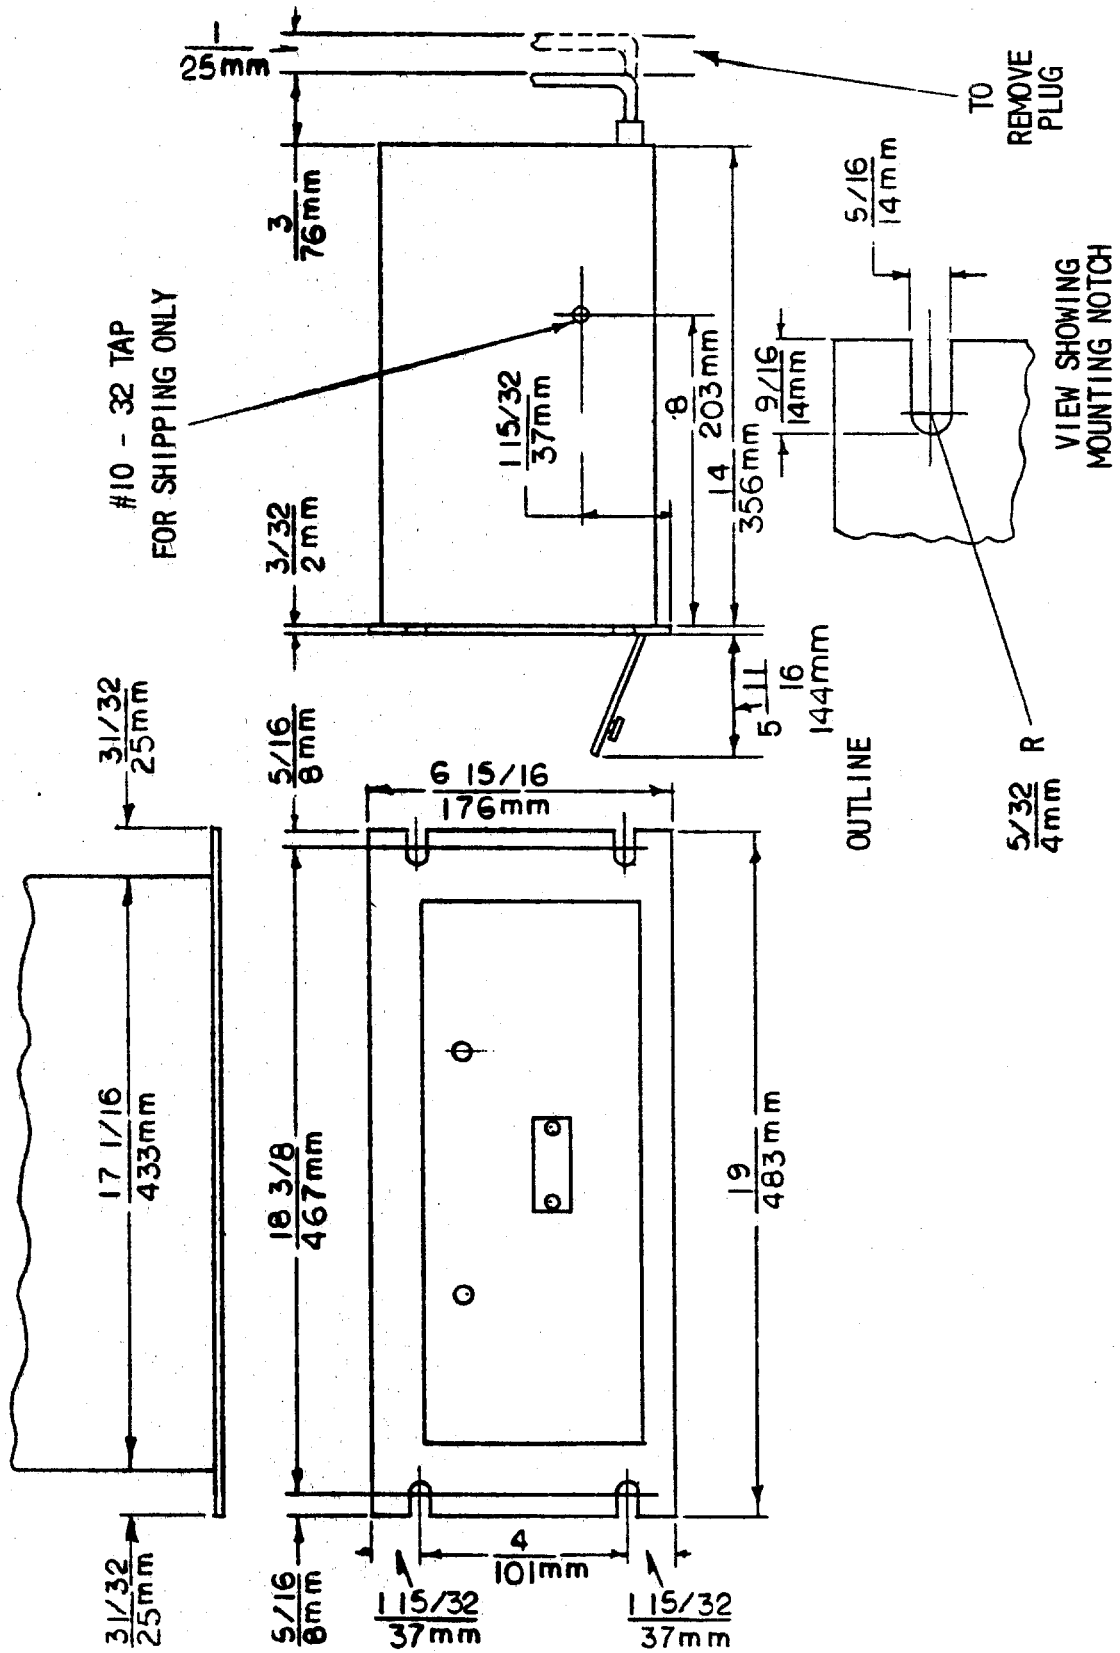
(0227A2037-1) Outline and Mounting Dimensions for the Type SLAT61K Relay
